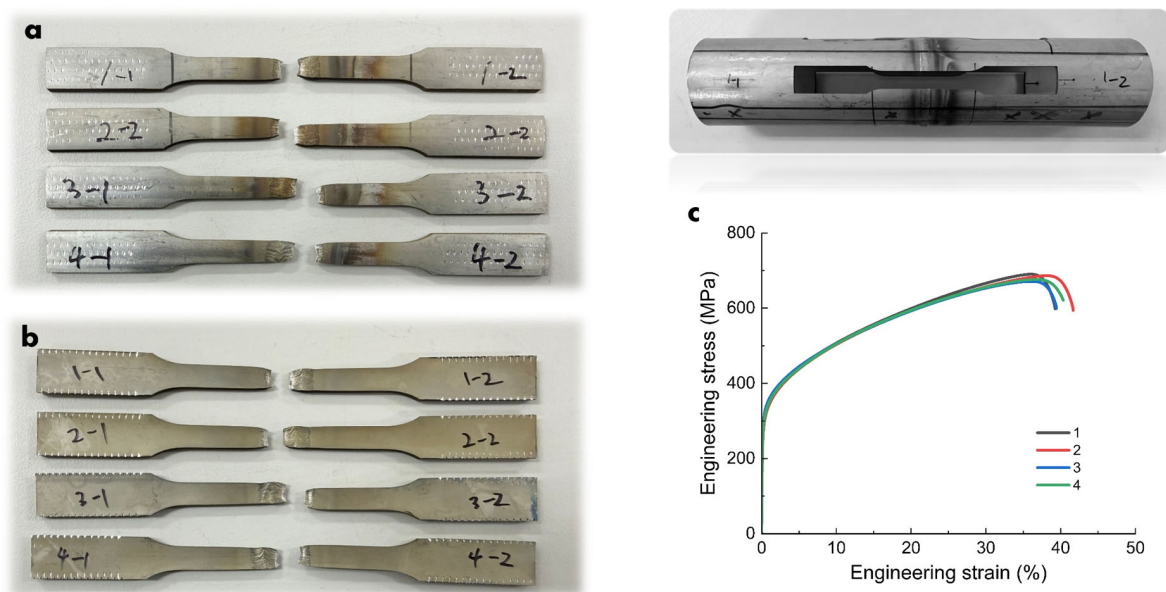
Cross-weld tensile testing of the circumferential orbital GTAW joints in the 304 stainless steel seam pipe. (a) Photographs of the four as-machined tensile specimens (Specimens 1–4), whose gauge sections contain the circumferential orbital GTAW weld at mid-length. (b) Corresponding specimens after tensile testing, showing uniform necking localized in the weld region with no evidence of brittle fracture or premature failure outside the weld. (c) Engineering stress–strain curves of the four cross-weld specimens tested in accordance with ASTM E8/E8M-22, demonstrating consistent yield and ultimate tensile strengths and large uniform elongations approaching ~40%.
